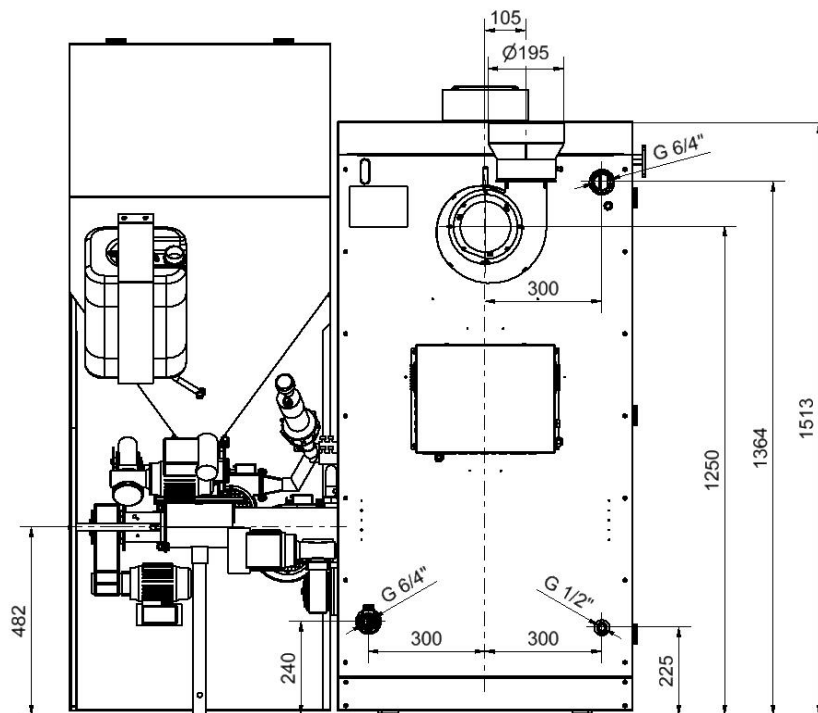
Connecting dimensions of BENEKOV R51 boiler
